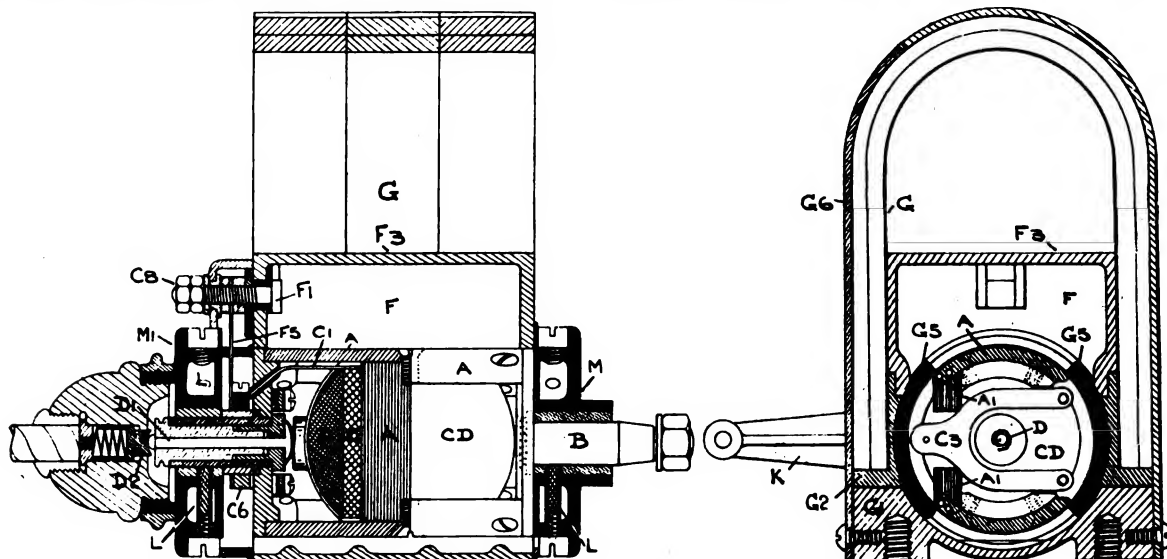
The Gianoli High-Tension Magneto.—Sectional drawings showing the construction of the machine. The manner in which the high-tension current is led from the Secondary Winding, D, to the Contact, D², is clearly shown in these views.
